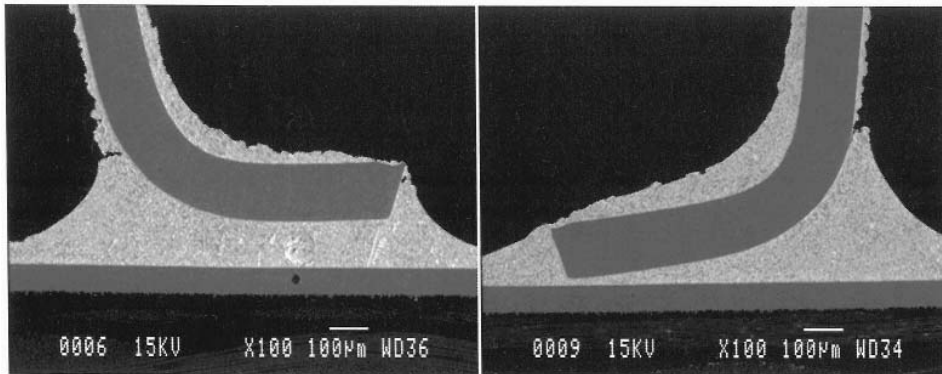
Microsections of corner solder joints on the reference board without staking compound
